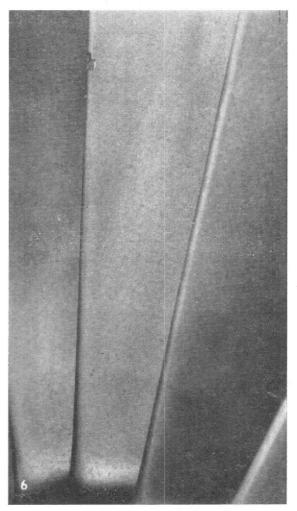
Acceptable damage, only minor blending needed to remove burrs from sides of the vane; protect bared metal with lacquer.
